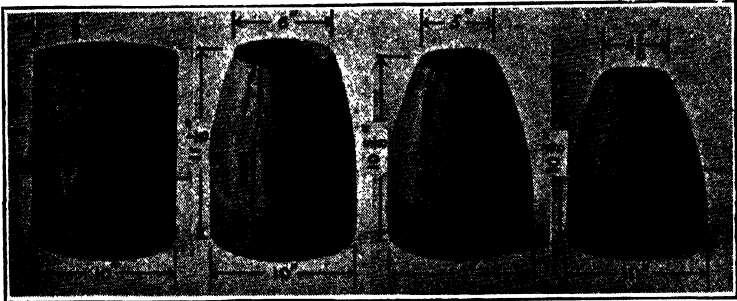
BENARDOS ELECTRICALLY WELDED CYLINDER AND RESULTS OF THE THREE COMPRESSIONS.
